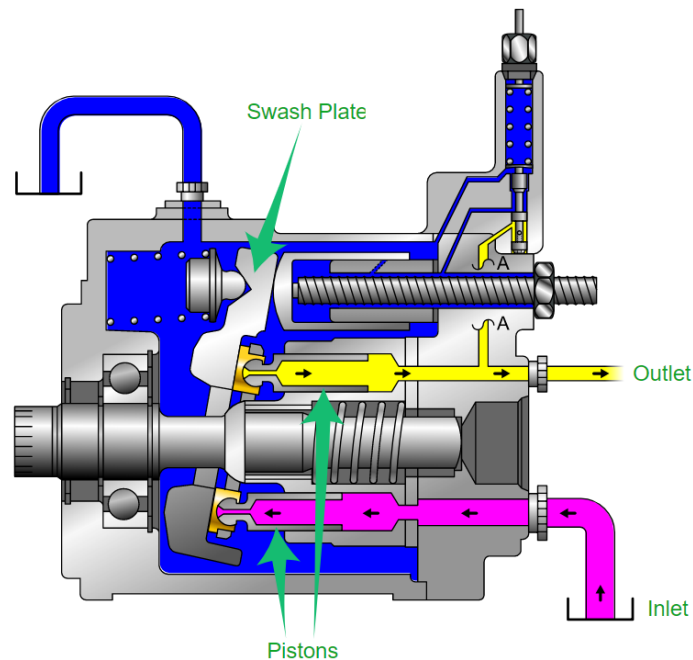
Sectional View of Axial Piston Swash-Plate Pump [9].
